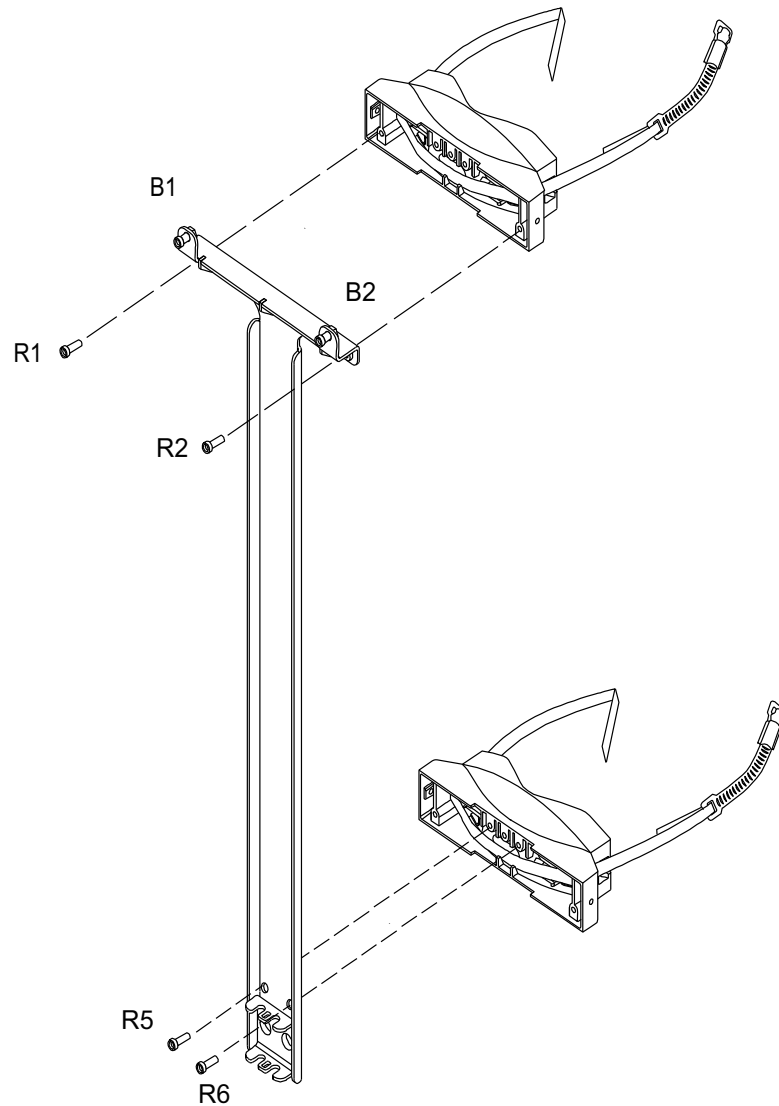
Attaching the mounting rack and the pole brackets with the pole mounting kit version 2
